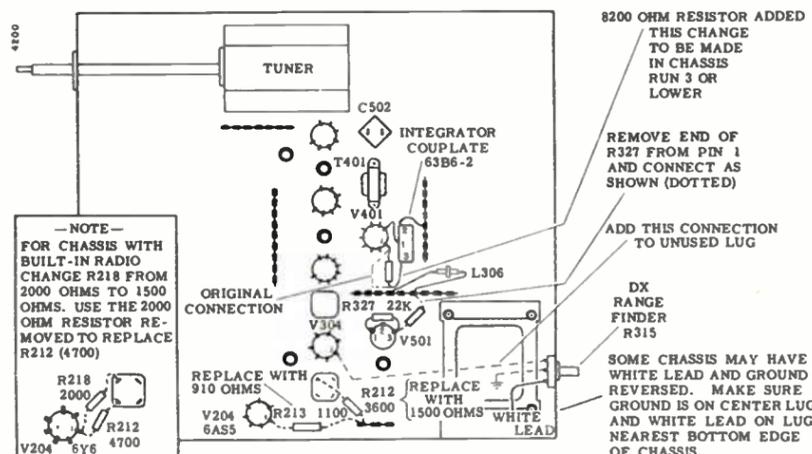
Bottom View of Chassis Showing Simplified Circuit Changes for Reducing Bending and Improving Horizontal Sync in Chassis Stamped Run 2 or Lower.
